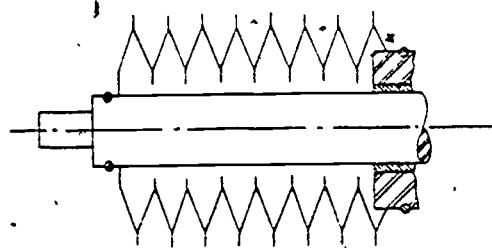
Cross-Sectional Sketch of a Rod Boot.
